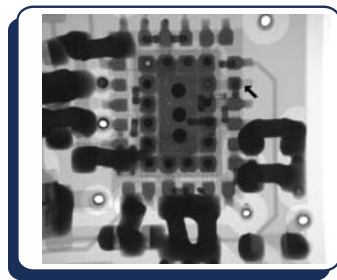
, X-Ray Image of PCB Assembly showing insufficient solder between device and land
